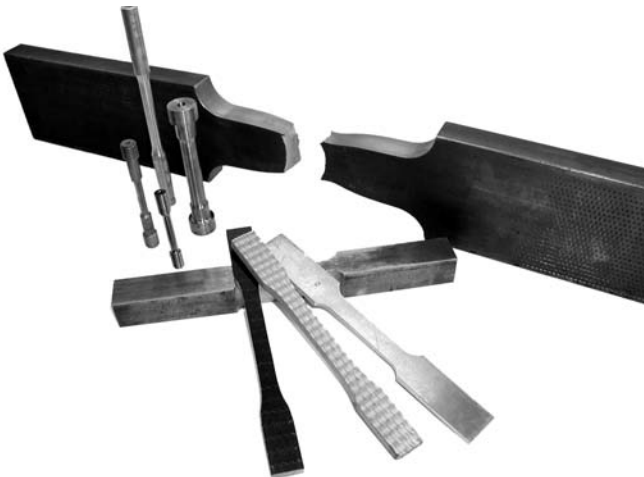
Several sample specimen geometries for tensile testing in accordance with ASTM E8. (Courtesy of the Instron Corporation)
